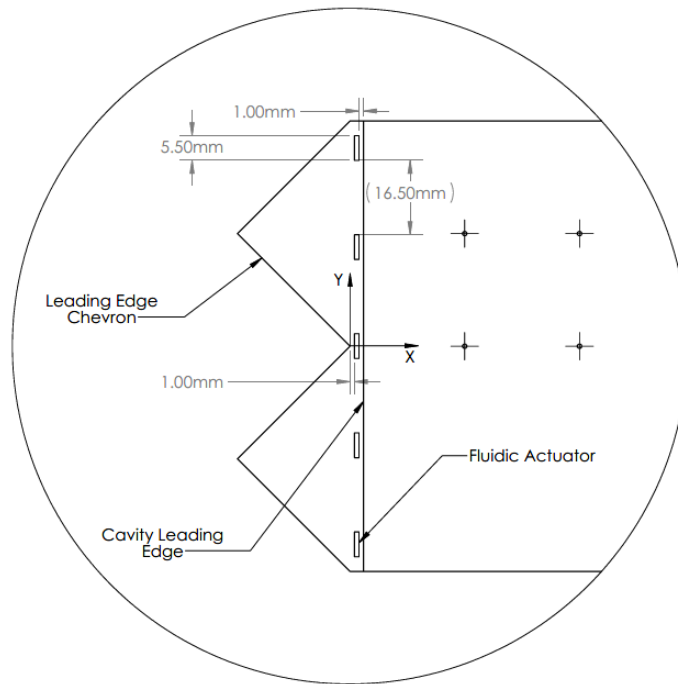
Schematic and principal dimensions of the fluid spoilers installed in the v2w000 geometry.
